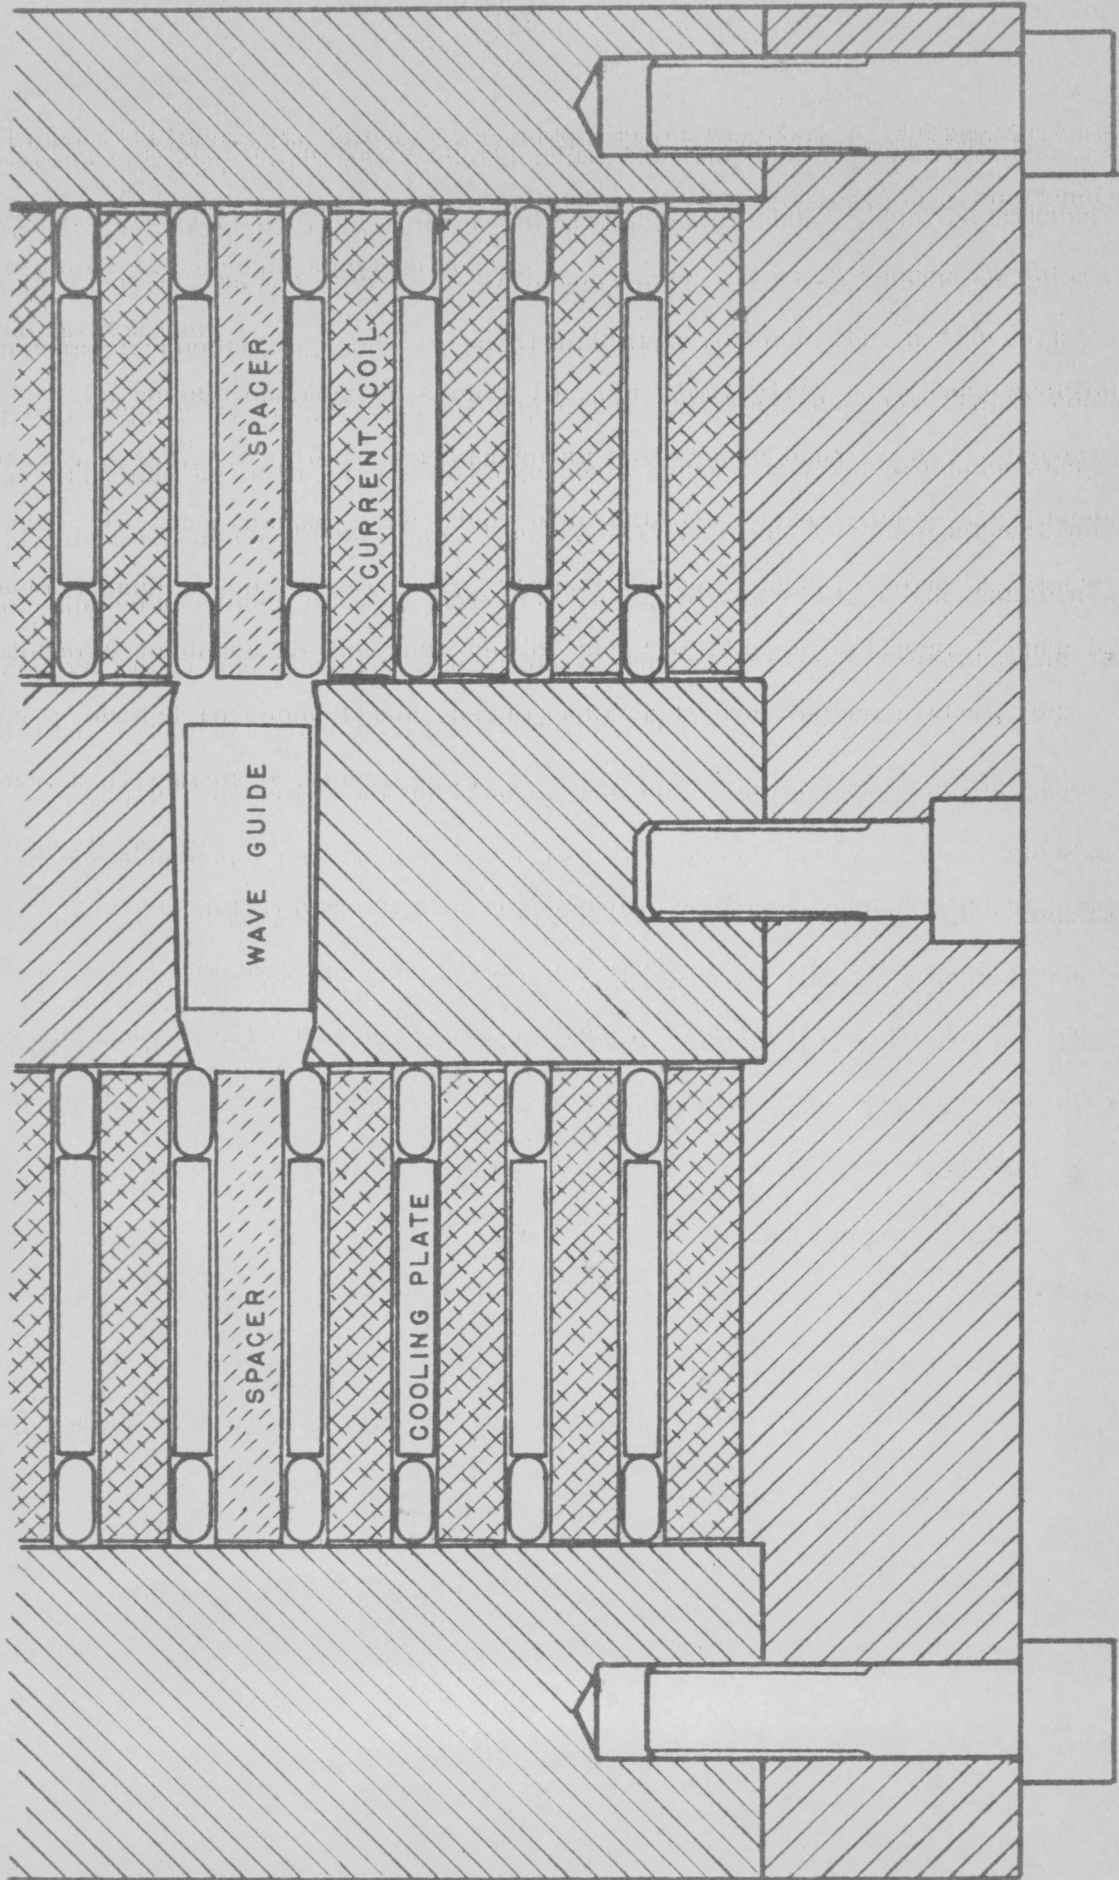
COILS AND COOLING SYSTEM ASSEMBLED
